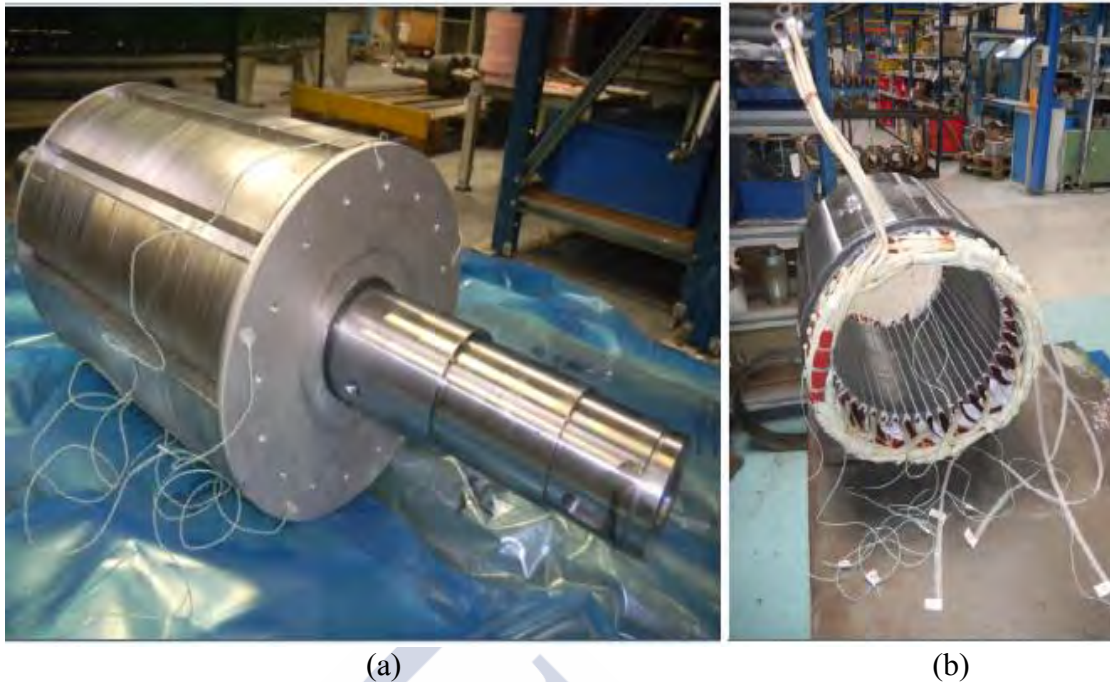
IkerMAQ (a) rotor and (b) stator. Notice the thermocouples and test coils.
